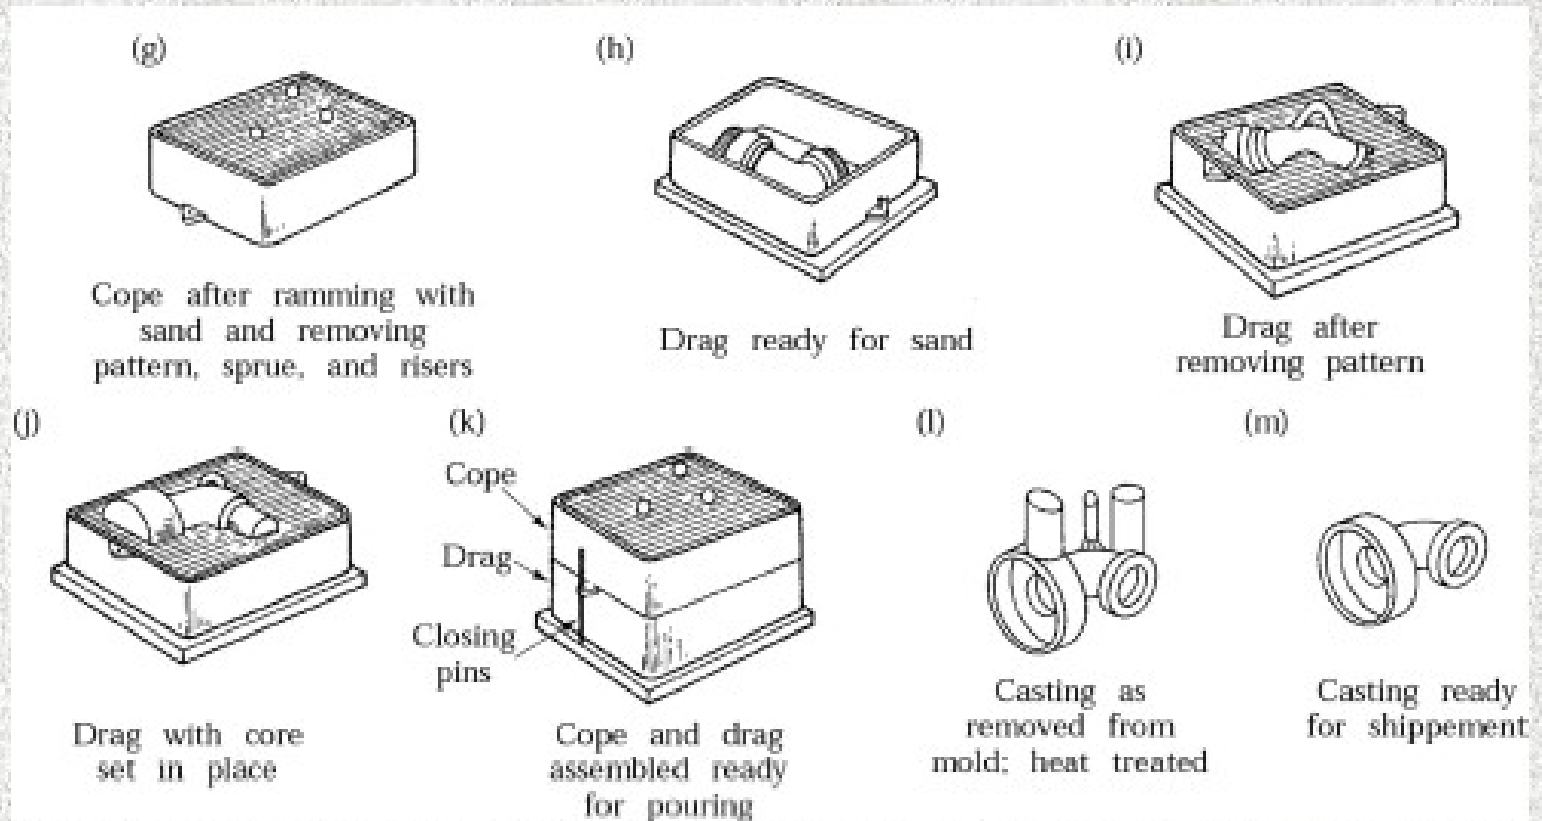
(g) The flask is rammed with sand and the plate and inserts are removed. (g) The drag half is produced in a similar manner, with the pattern inserted. A bottom board is placed below the drag and aligned with pins. (i) The pattern, flask, and bottom board are inverted, and the pattern is withdrawn, leaving the appropriate imprint. (j) The core is set in place within the drag cavity. (k) The mold is closed by placing the cope on top of the drag and buoyant forces in the liquid, which might lift the cope. (l) After the metal solidifies, the casting is removed from the mold. (m) The sprue and risers are cut off and recycled and the casting is ready for shipment.
